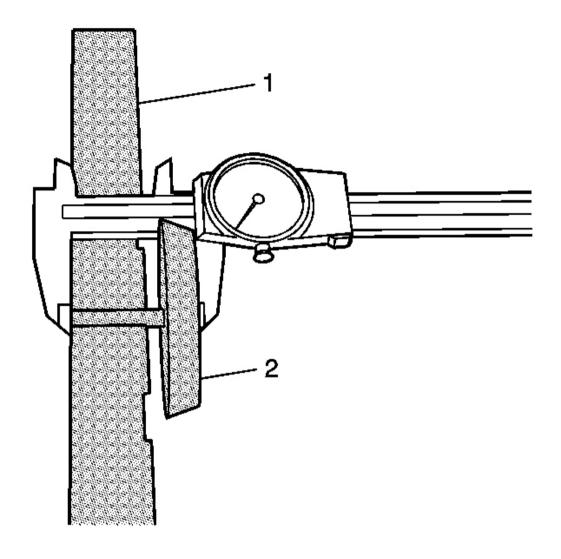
Measuring Height Of J 44388-1 & J 44388-2 Courtesy of GENERAL MOTORS CORP.
